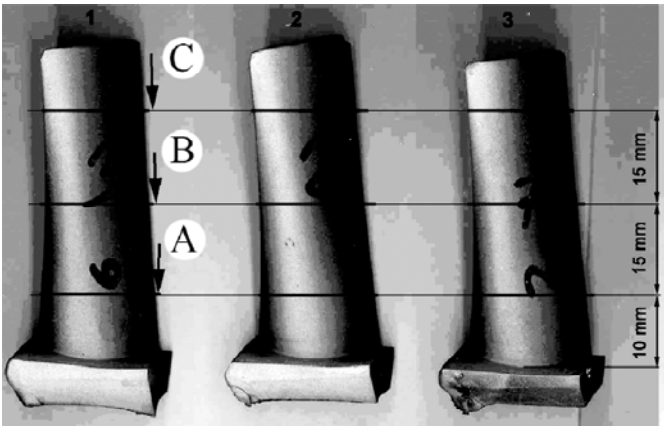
The pattern of cut of turbine blade casting with dimensions of 22x50 mm
